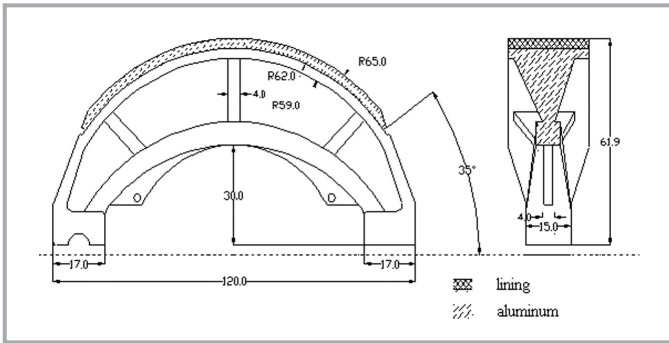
Motorcycle brake shoe and its cross-sectional area (dimensions in mm)
